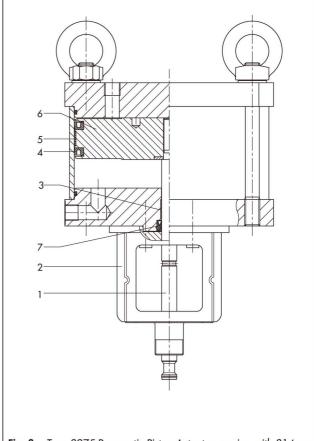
Type 3275 Pneumatic Piston Actuator, version with 314 or 490 cm² effective actuator area
